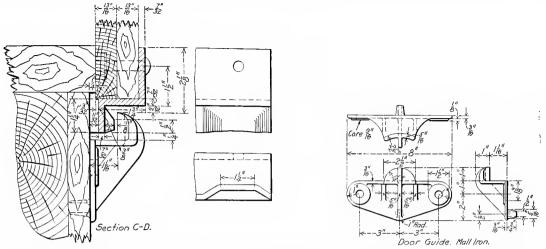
Details for M. C. B. Standard Outside Hung Box Car Side Door. (M. C. B. Sheet 30.) See also Fig. 2745.
